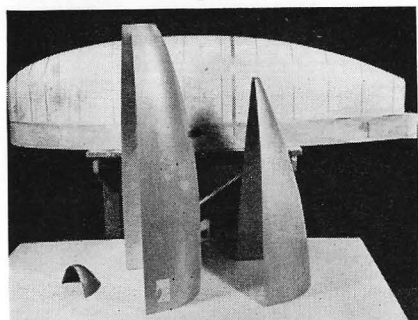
Using the Hufford machine background parts like the wing tip shown in Fig. 7 can be stretch-formed in aluminium alloy. The resulting job is cheaper and quicker to produce
